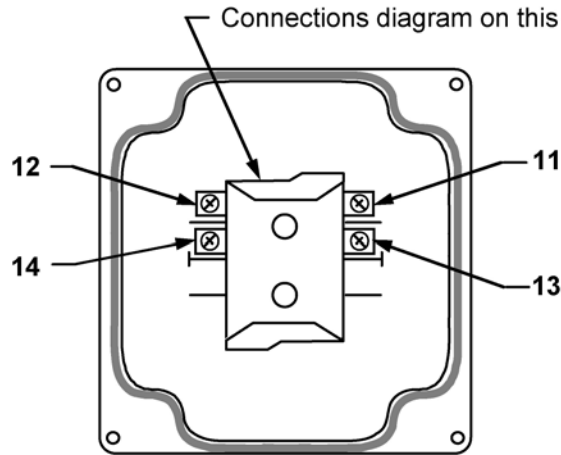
Wiring Connections in One-hand Control Switch (Switch Cover, Bottom View)
